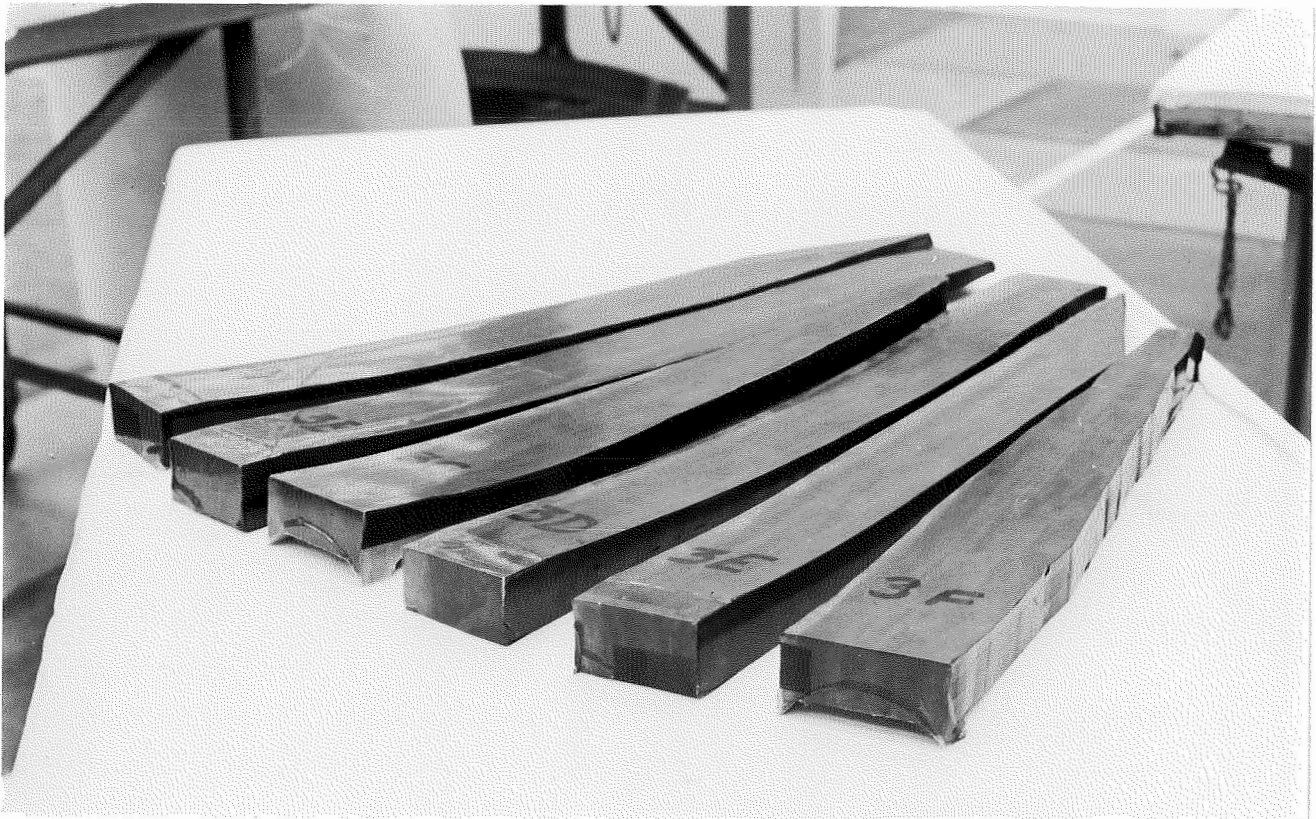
SEGMENTED RUBBER MANDREL DETAILS
